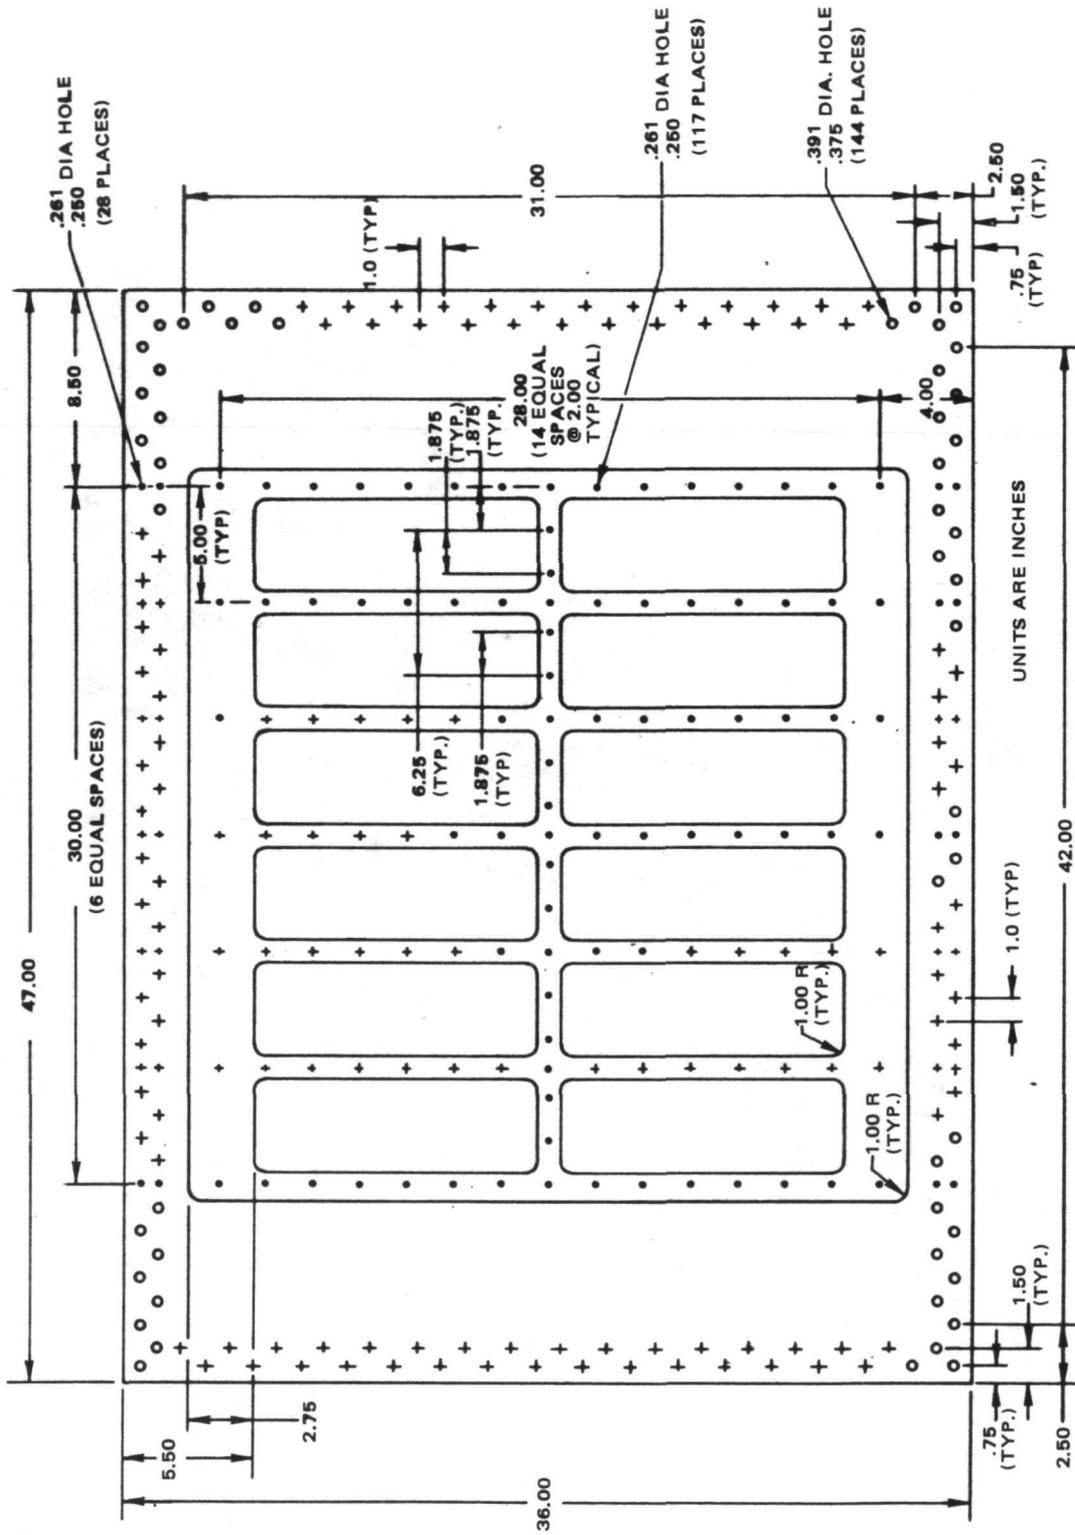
TEST WEB 3 LAMINATE CLADDING DETAILS
